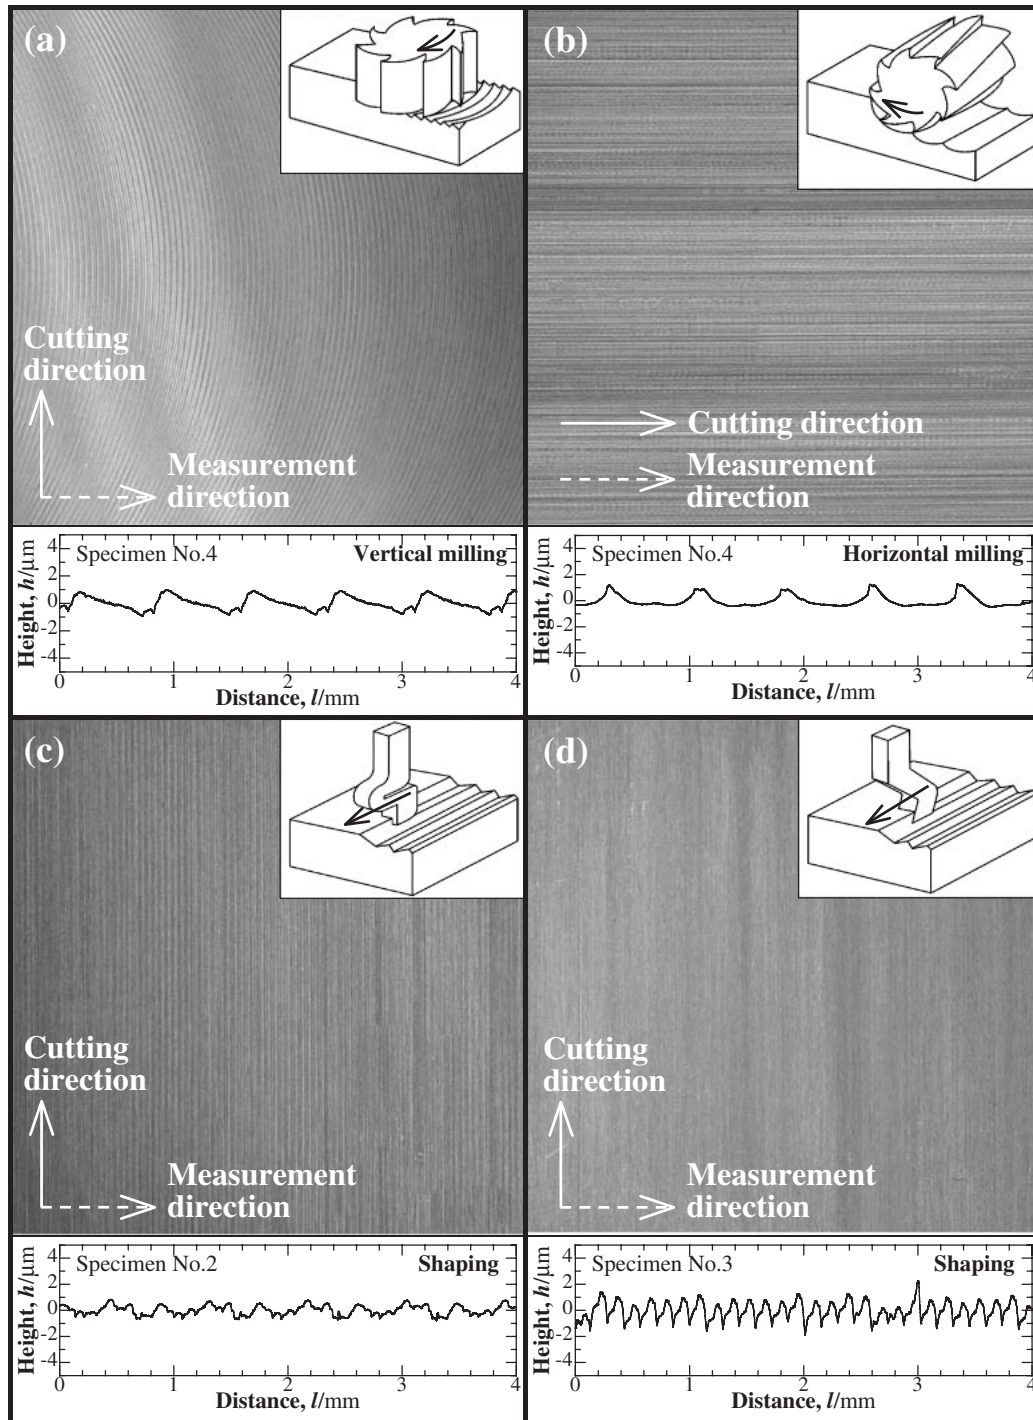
Photographs and roughness profiles: (a) Vertical milling, (b) Horizontal milling, (c) Shaping (spring-necked turning tool) and (d) Shaping (goose-necked turning tool).
